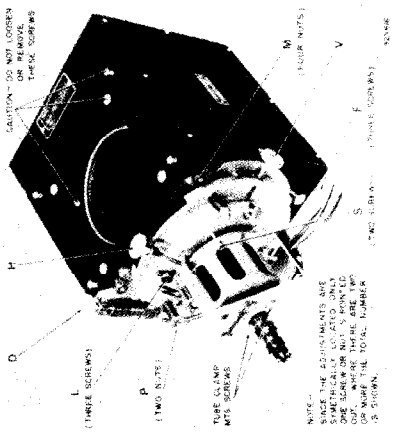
Projection unit, mechanical adjustments. Mechanical Adjustments - Refer to Fig. 11. for location of adjustments.
